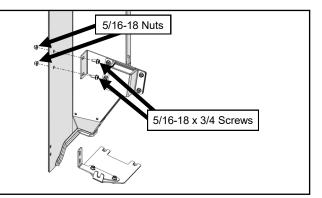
(Rear Leg to Side Frame Fasteners)
